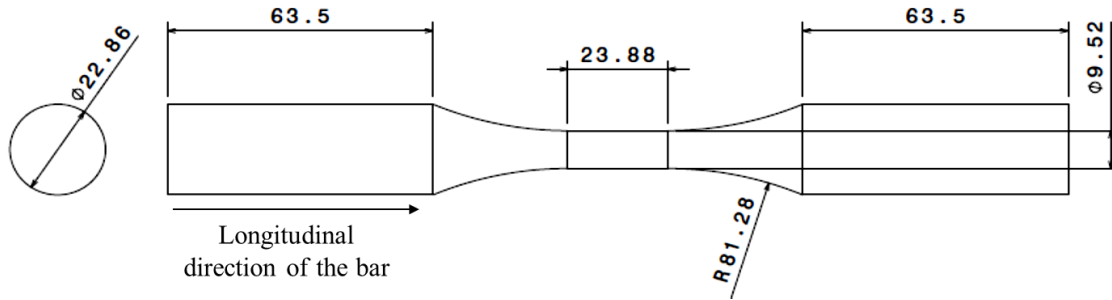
Uniform gage cylindrical specimen dimensions (in mm) for stress-controlled fatigue tests
